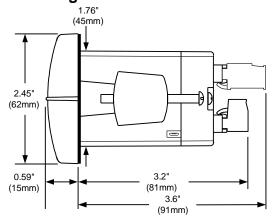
1/8 DIN Panel Cutout Dimensions and Panel Mounting Details
